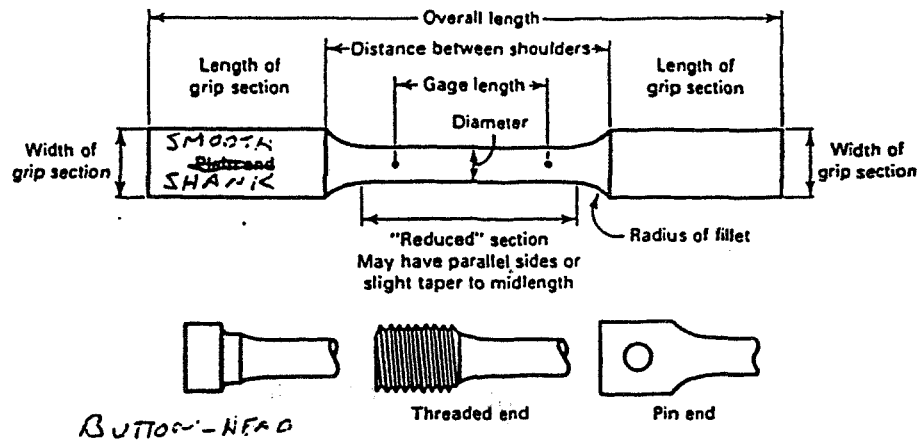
Nomenclature for a typical test specimen. The ends of round specimens may have smooth shanks, button-heads, or threads. Smooth shanks should be long enough to accommodate some type of wedge grip. Rectangular specimens are generally made with smooth shanks, but may be shouldered to contain a hole for a pin bearing.
